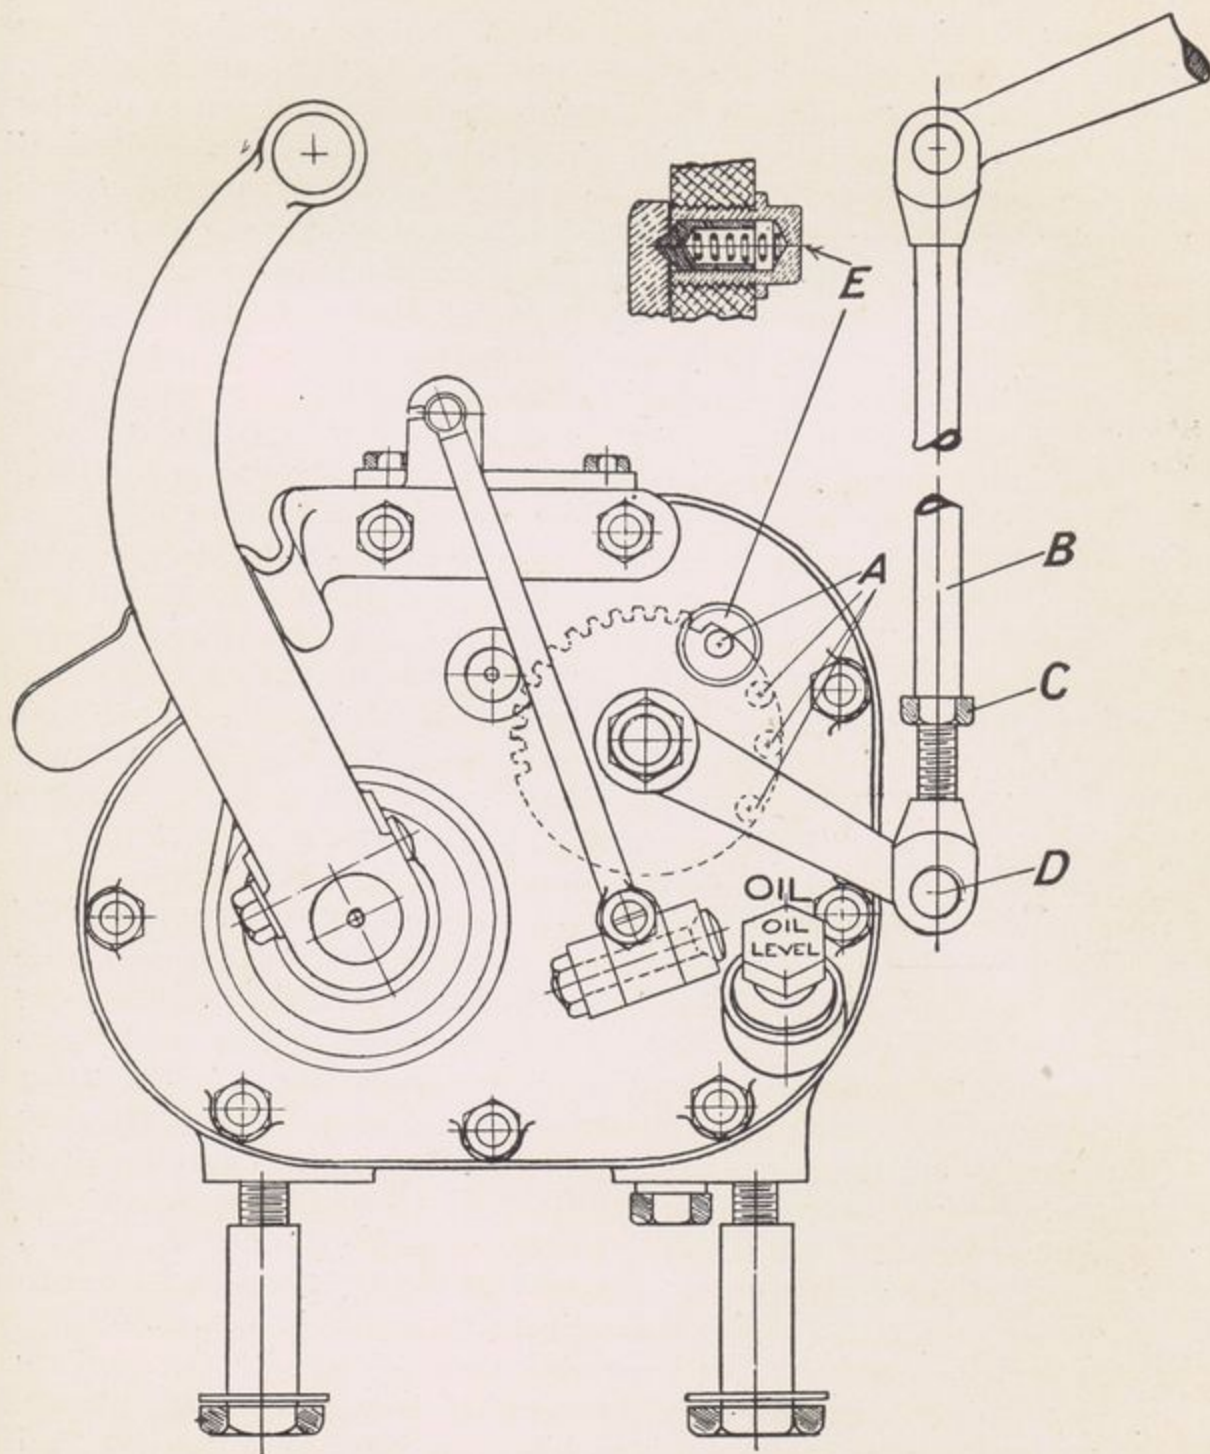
THE P. & M. GEAR-BOX AND CLUTCH OPERATING MECHANISM
